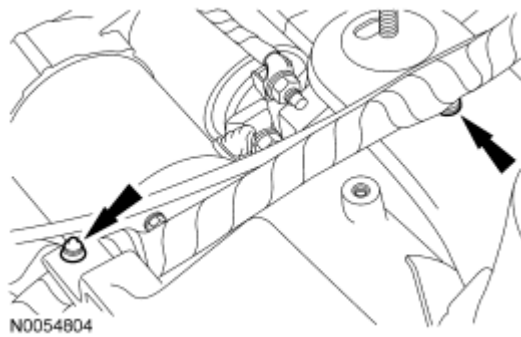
Locating Wiring Harness Retainers From Transmission Mount & Battery Tray Bracket
